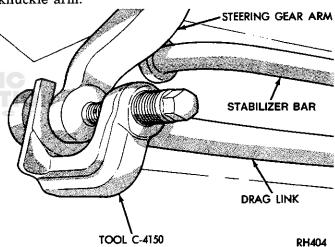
Drag-Link Ball Stud Removal With Tool C-4150
